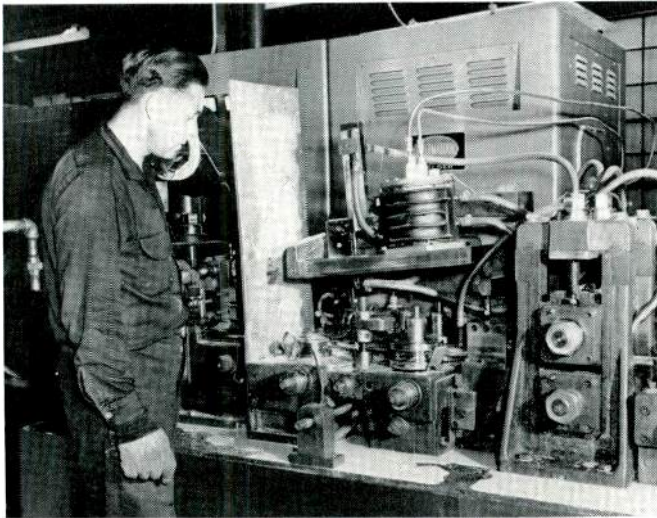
Closeup of Thermatool head welding aluminum tubing.
